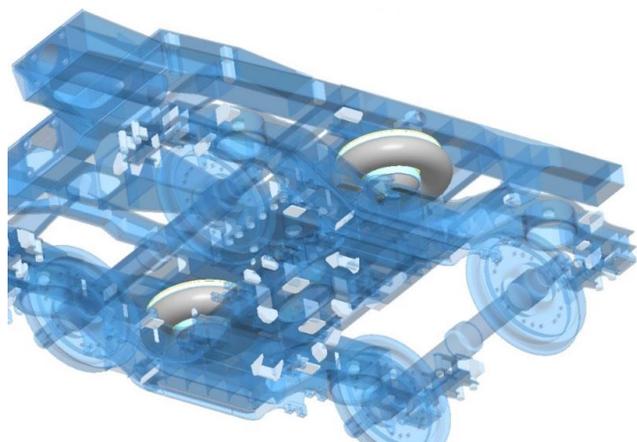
Secondary suspension assembly for 41MN and 46AN bogies
